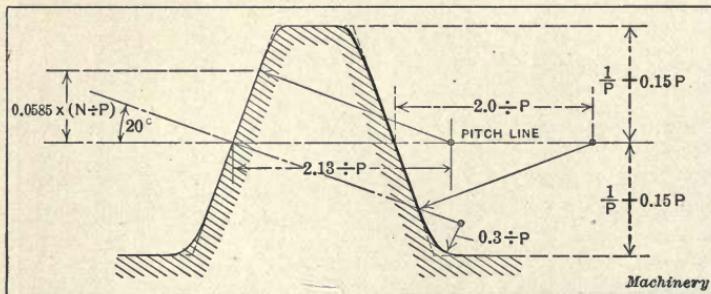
Hob Tooth for generating a 20-degree Involute Milled Tooth
